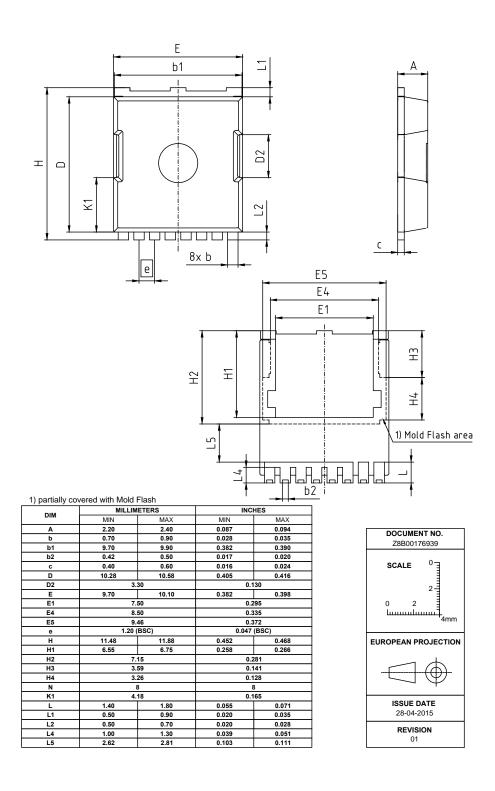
Outline PG-HSOF-8, dimensions in mm/inches
